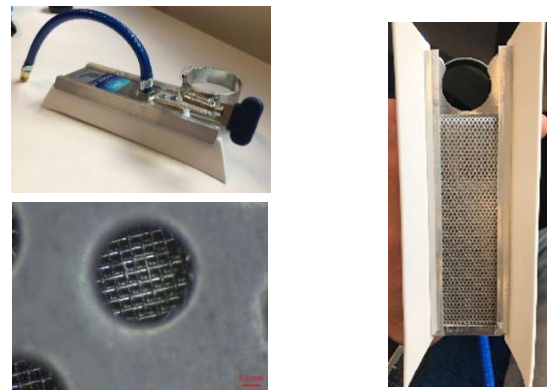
TITECH PRO™ trailing shield used for standard welding applications
